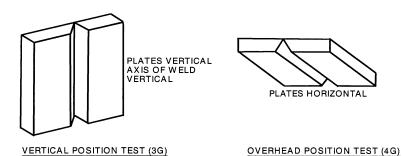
POSITIONS OF TEST PLATES FOR GROOVE WELDS
